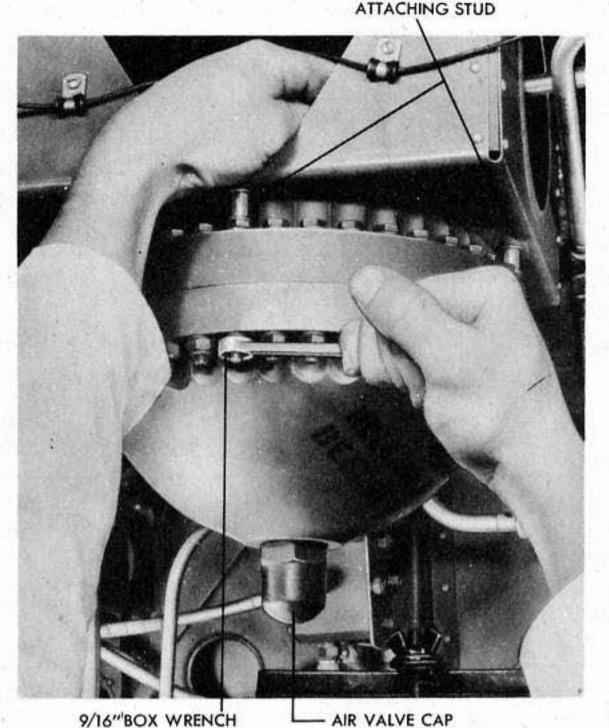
REMOVING HYDRAULIC PRESSURE ACCUMULATOR
